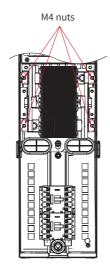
Steps to remove the AC reactor in 380 V drive cabinet
